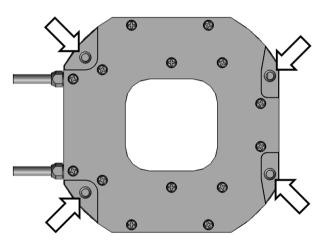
P-763: Holes at the bottom for mounting the positioner onto an underlying surface
